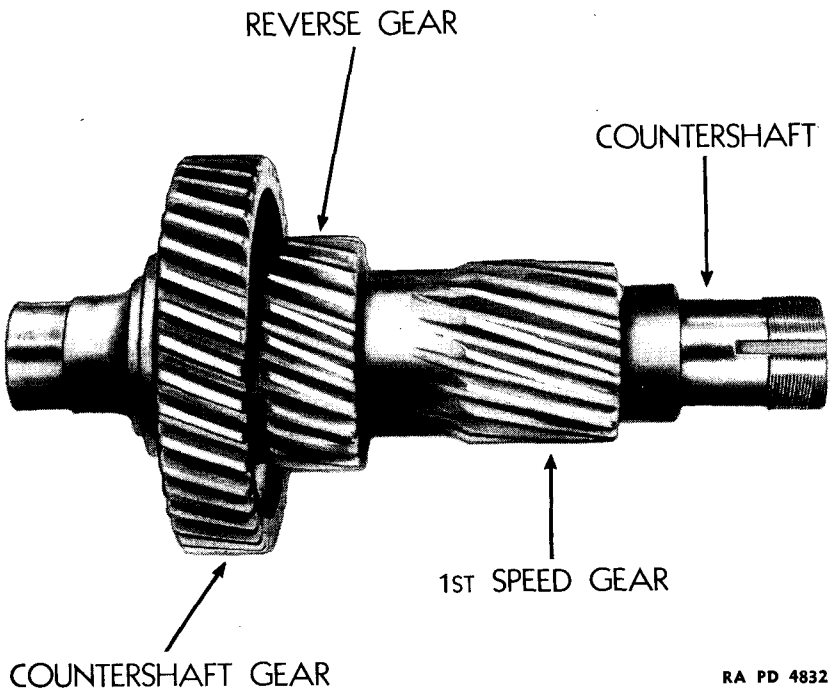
COUNTERSHAFT ASSEMBLY
